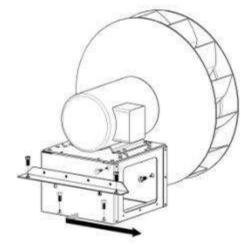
Bolts which Connect Motor Mount to Blower Fan
